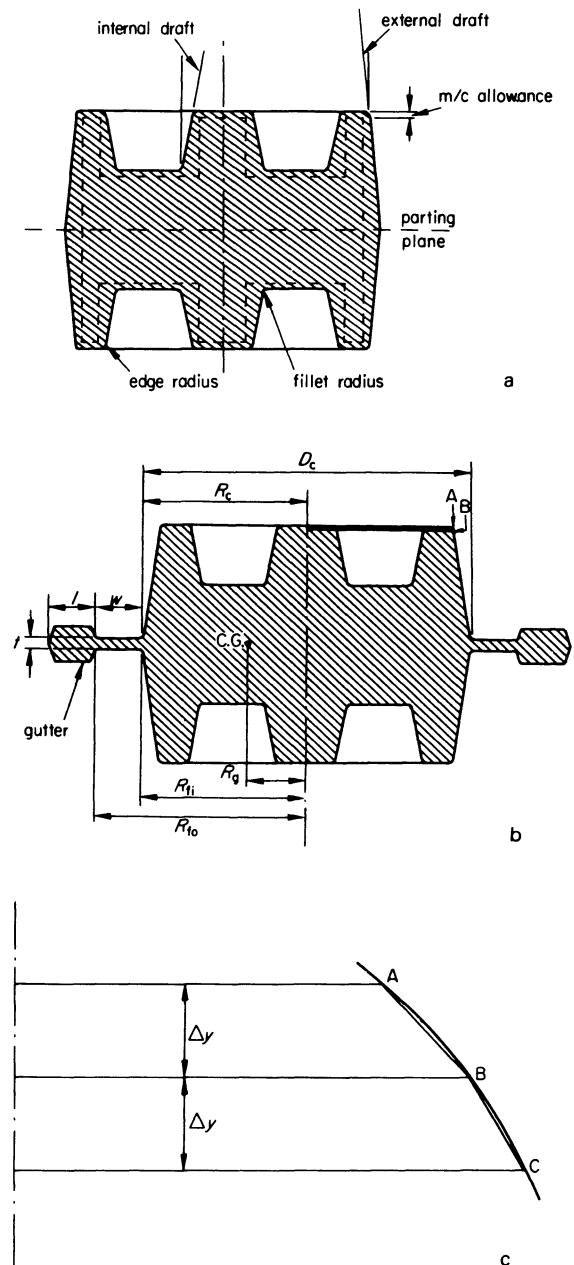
(a) Typical axisymmetric forging, (b) Forging cavity, including flash gutter, (c) Enlarged view of the radius segment.
